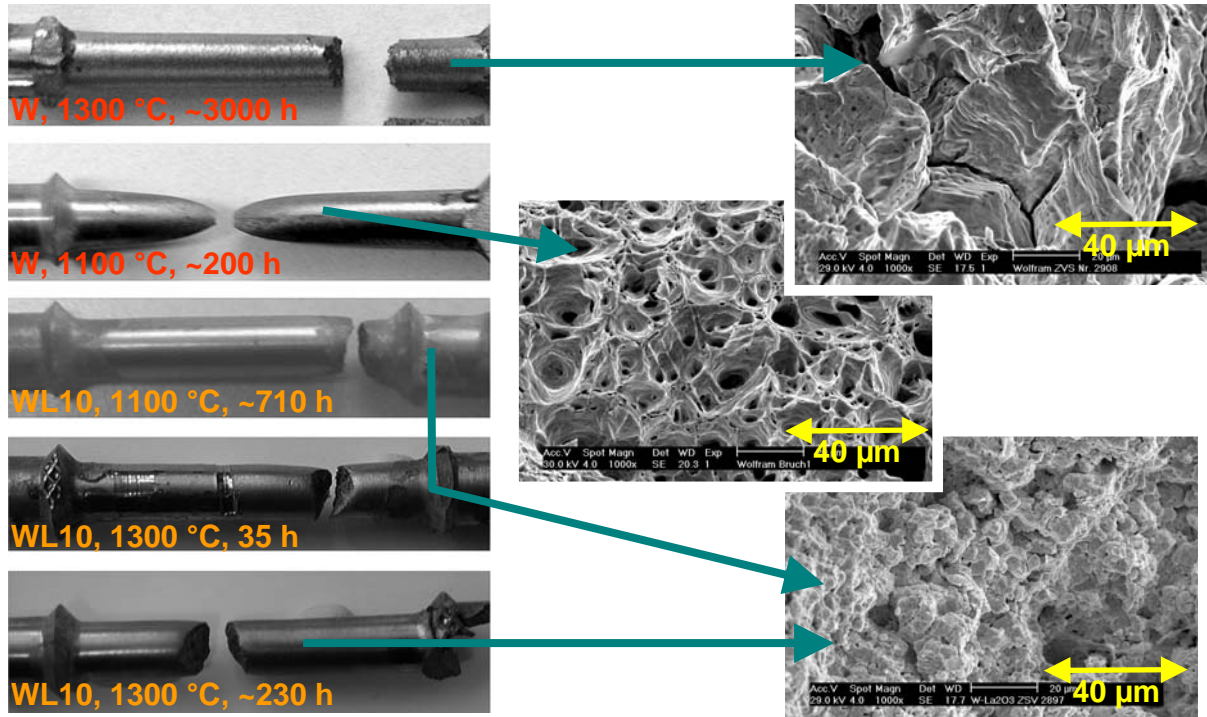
Fractured specimens and the according fracture surfaces.
